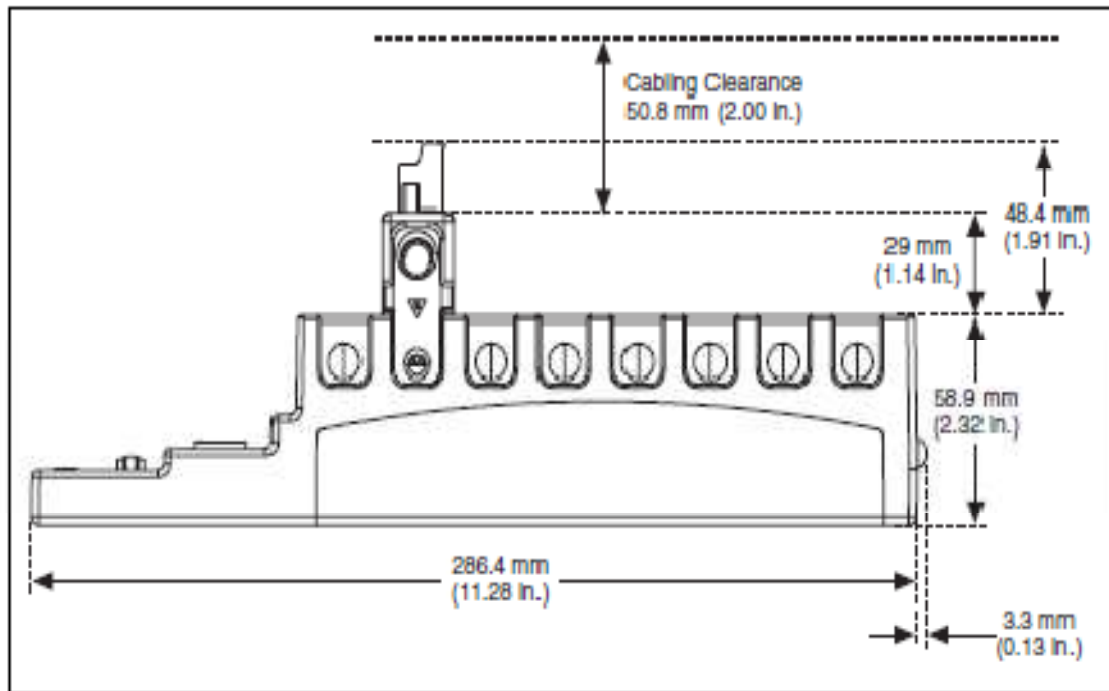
cRIO-9072/3/4, Bottom View with Dimensions
